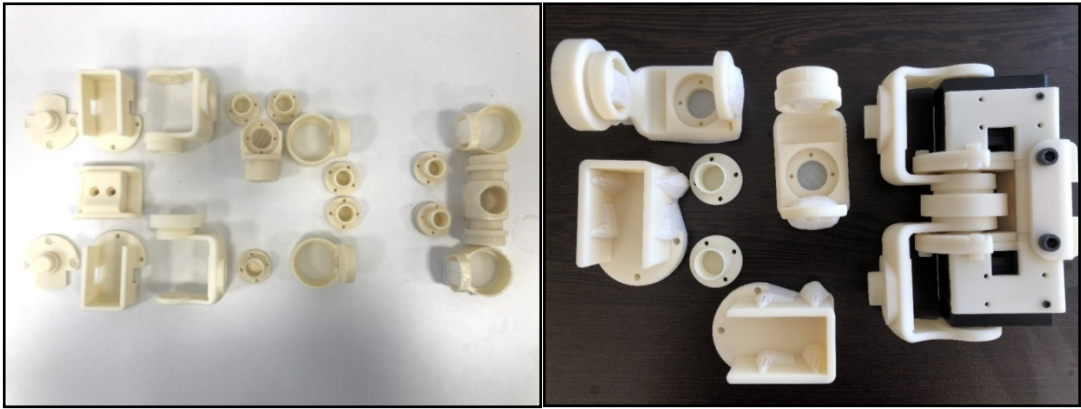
Prototype production and assembly stages (Actuator and carbon limbs assembly)
